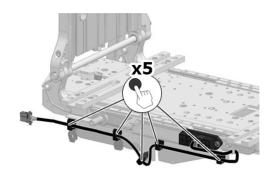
Tilt motor cable mounted with five cable brackets (seat depth $15^{\prime\prime}$ - $21^{\prime\prime}$).
